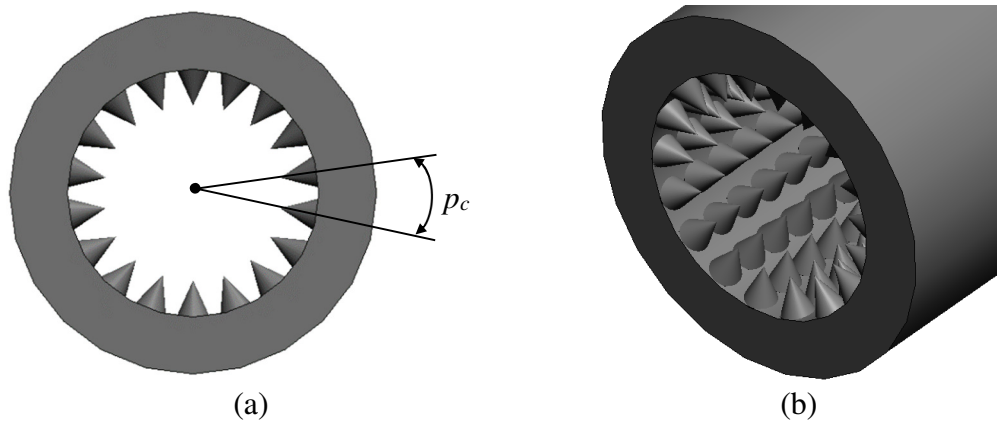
(a) Cross-sectional view and (b) isometric view of condenser tube with conical pin fins.
